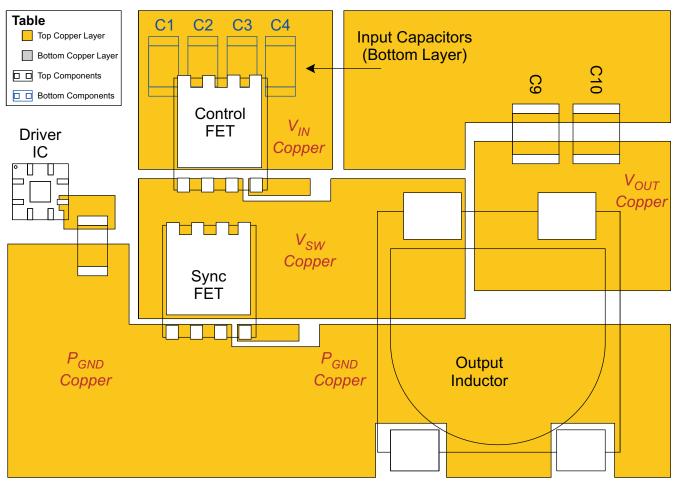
Typical Placement and PCB Layout of the Power Stage Components
